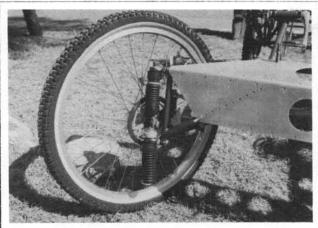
Front wheel with disc brakes, suspension, and supplementary aluminum sheeting.
